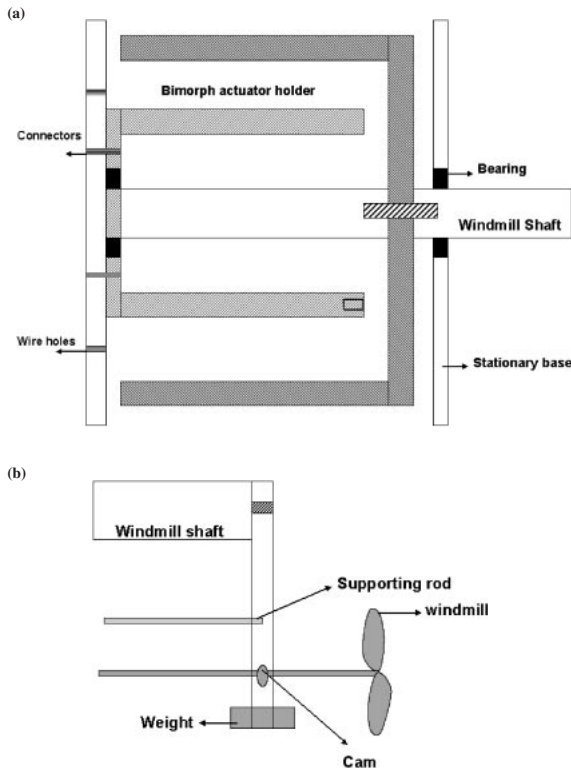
Schematic drawing of the windmill structure. (a) Bimorph actuator holder and method of mounting the whole assembly on a rotating shaft. (b) Cross-section of the fan-assembly along with the hanging weight and cam-shaft mechanism used for generating the oscillatory motion from the wind flow.
